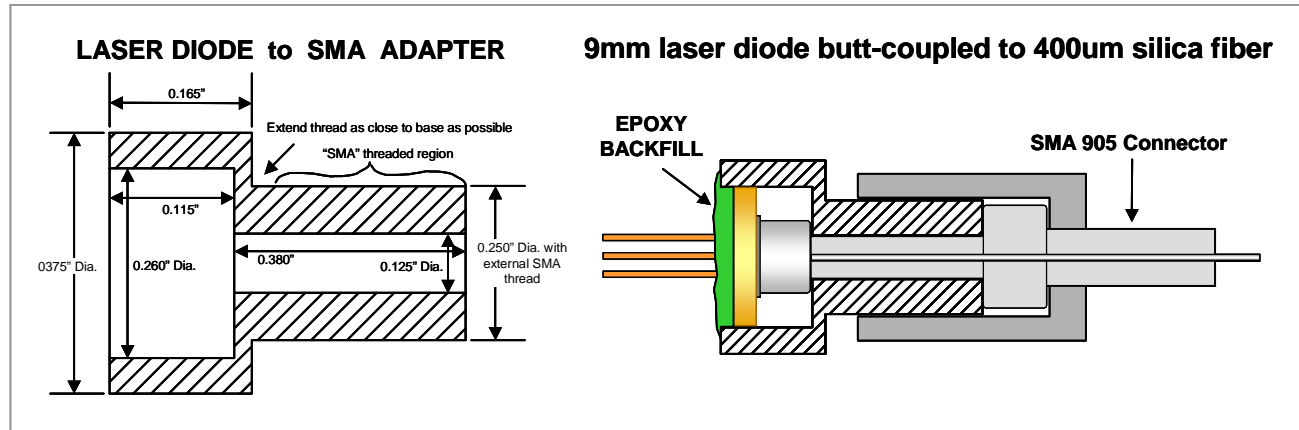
Drawing of a machined laser diode mounting fixture designed to couple laser diodes in standard 9mm packages to large diameter optical fibers equipped with SMA 905 connectors. The fixture was designed to provide 100um of clearance between the window surface and the fiber endface.
